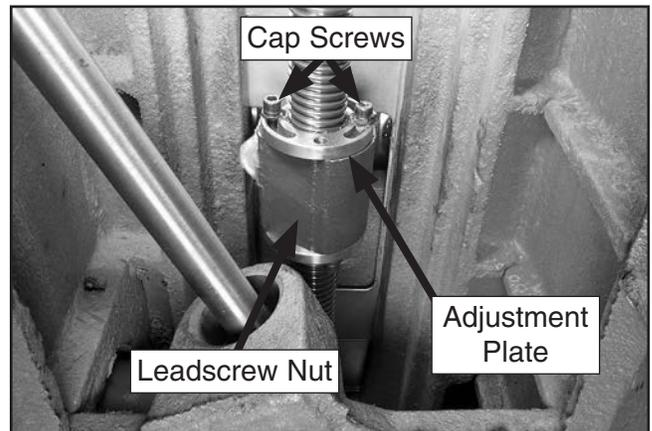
Y-axis feed leadscrew nut and backlash adjustment plate.
